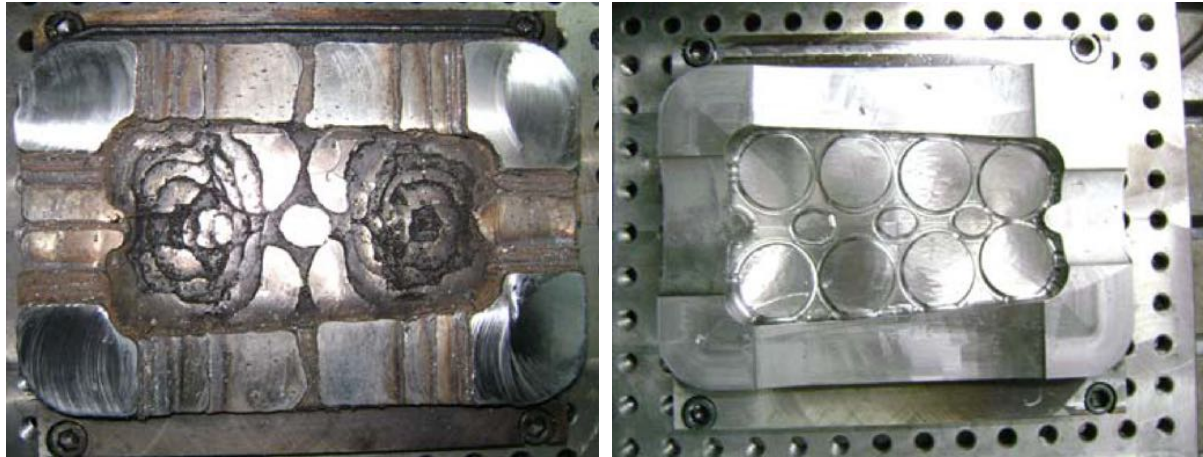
Example manufacture of a mould core using retro-fitted additive (GMAW) and subtractive (CNC machining) [66]
